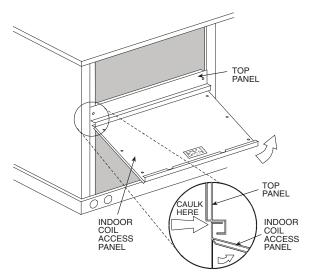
Indoor Coil Access Panel Relocation (Size 08-14 Shown)
